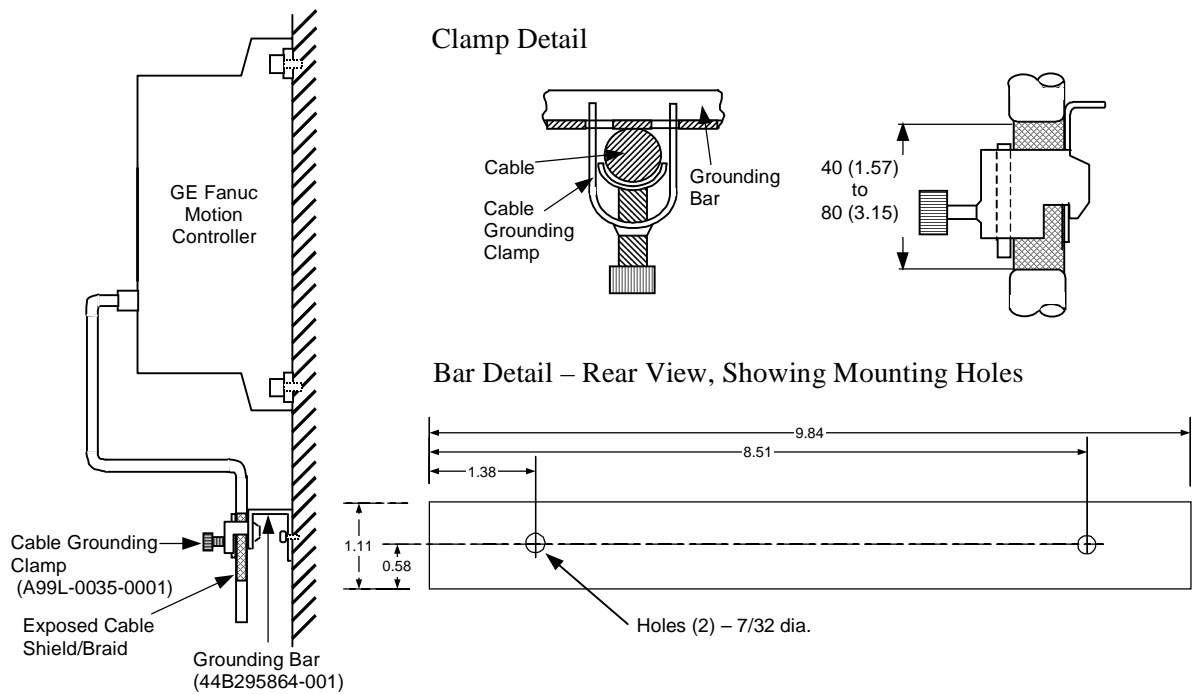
Detail of Cable Grounding Clamp (A99L-0035-0001) and Bar (44B295864-001)
